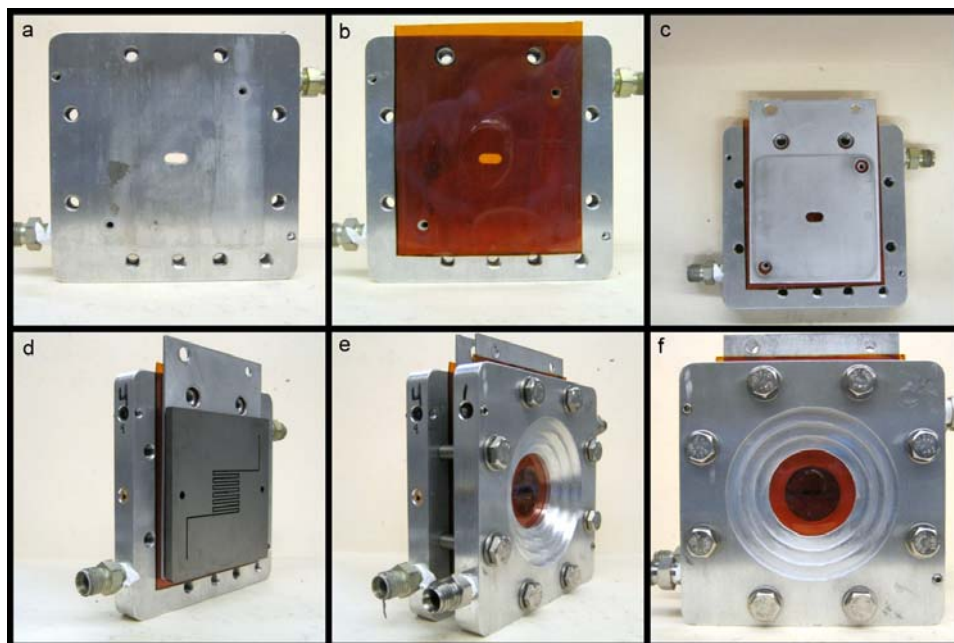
Images of custom fuel cell hardware components (a) Anodic aluminum end plate with 8 threaded holes for uniform compression of the MEA and 2 extra holes for attachment to a sample stage (b) Kapton® insulator (c) Anodic stainless steel current collector (d) Graphite flow field with serpentine pattern for uniform gas delivery (e) Fully assembled hardware (f) Front view of cathode side.
